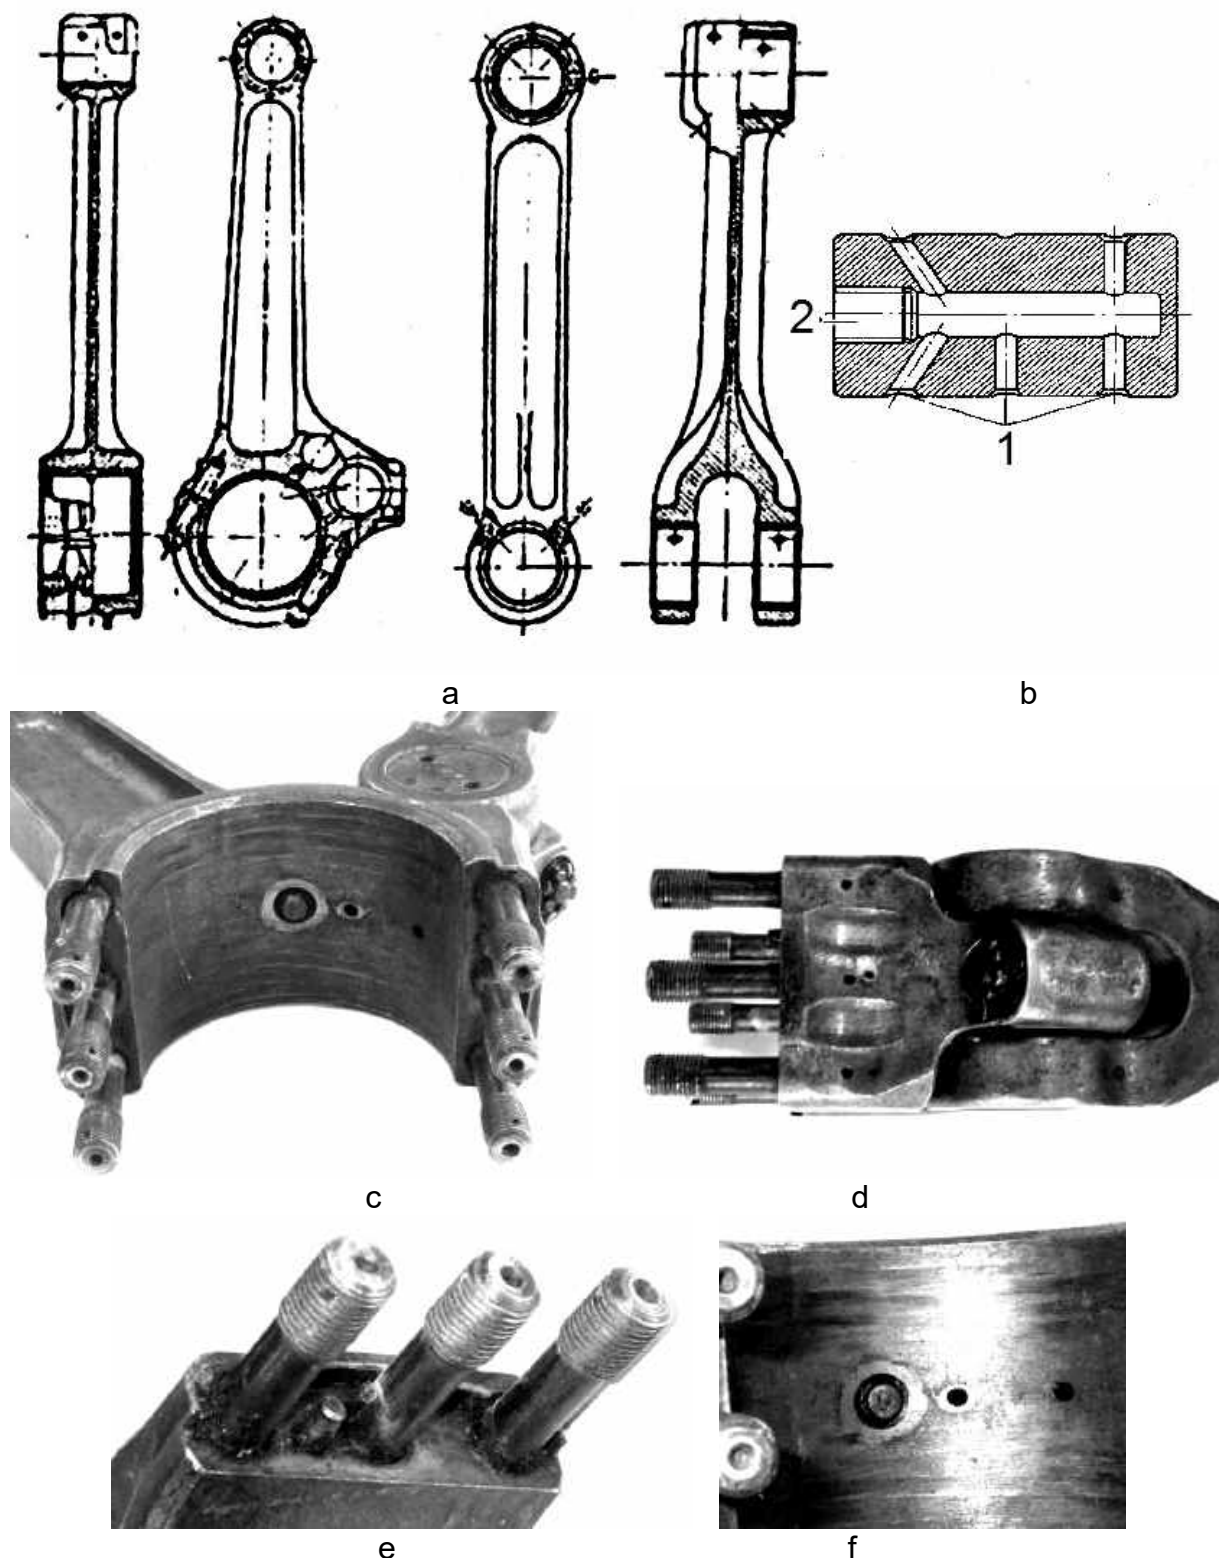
The connecting rods of the AM-38 V-shape engine: a – master connecting rod; b – link rod (1 – oil feeding channels, 2 – hole for the end cap); c – view from the lower half side; d – fixation of the link rod pin; e – centering elements (the ledge and the pin); f – locking device preventing the bearing from the turn.
